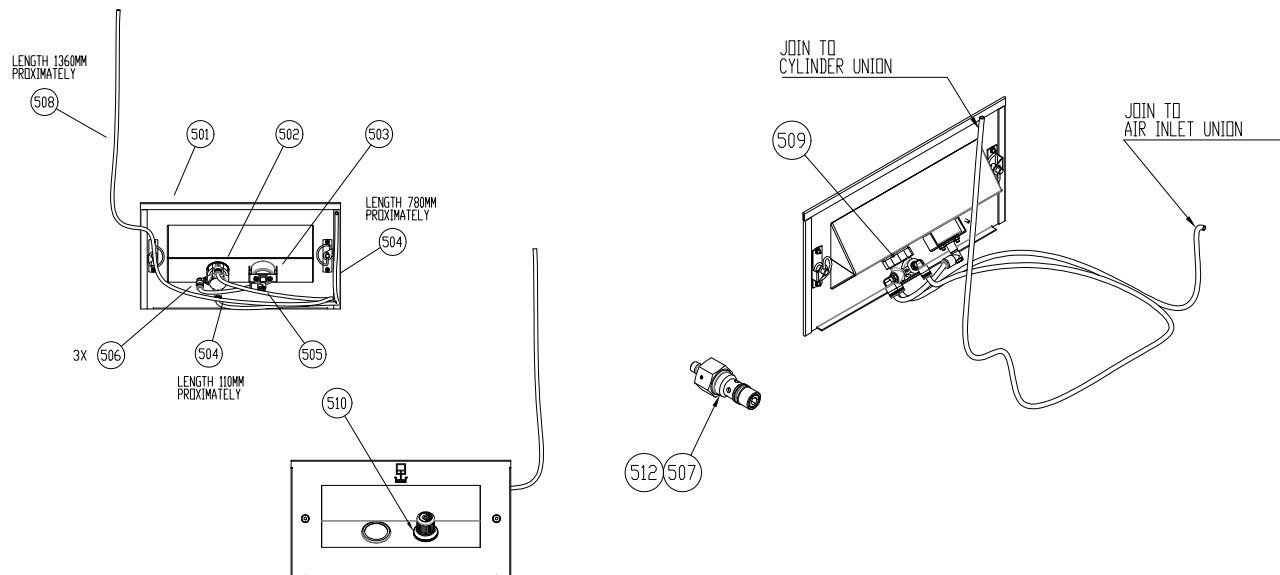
Manual PCV and Cylinder Pressure Control Assembly Parts
